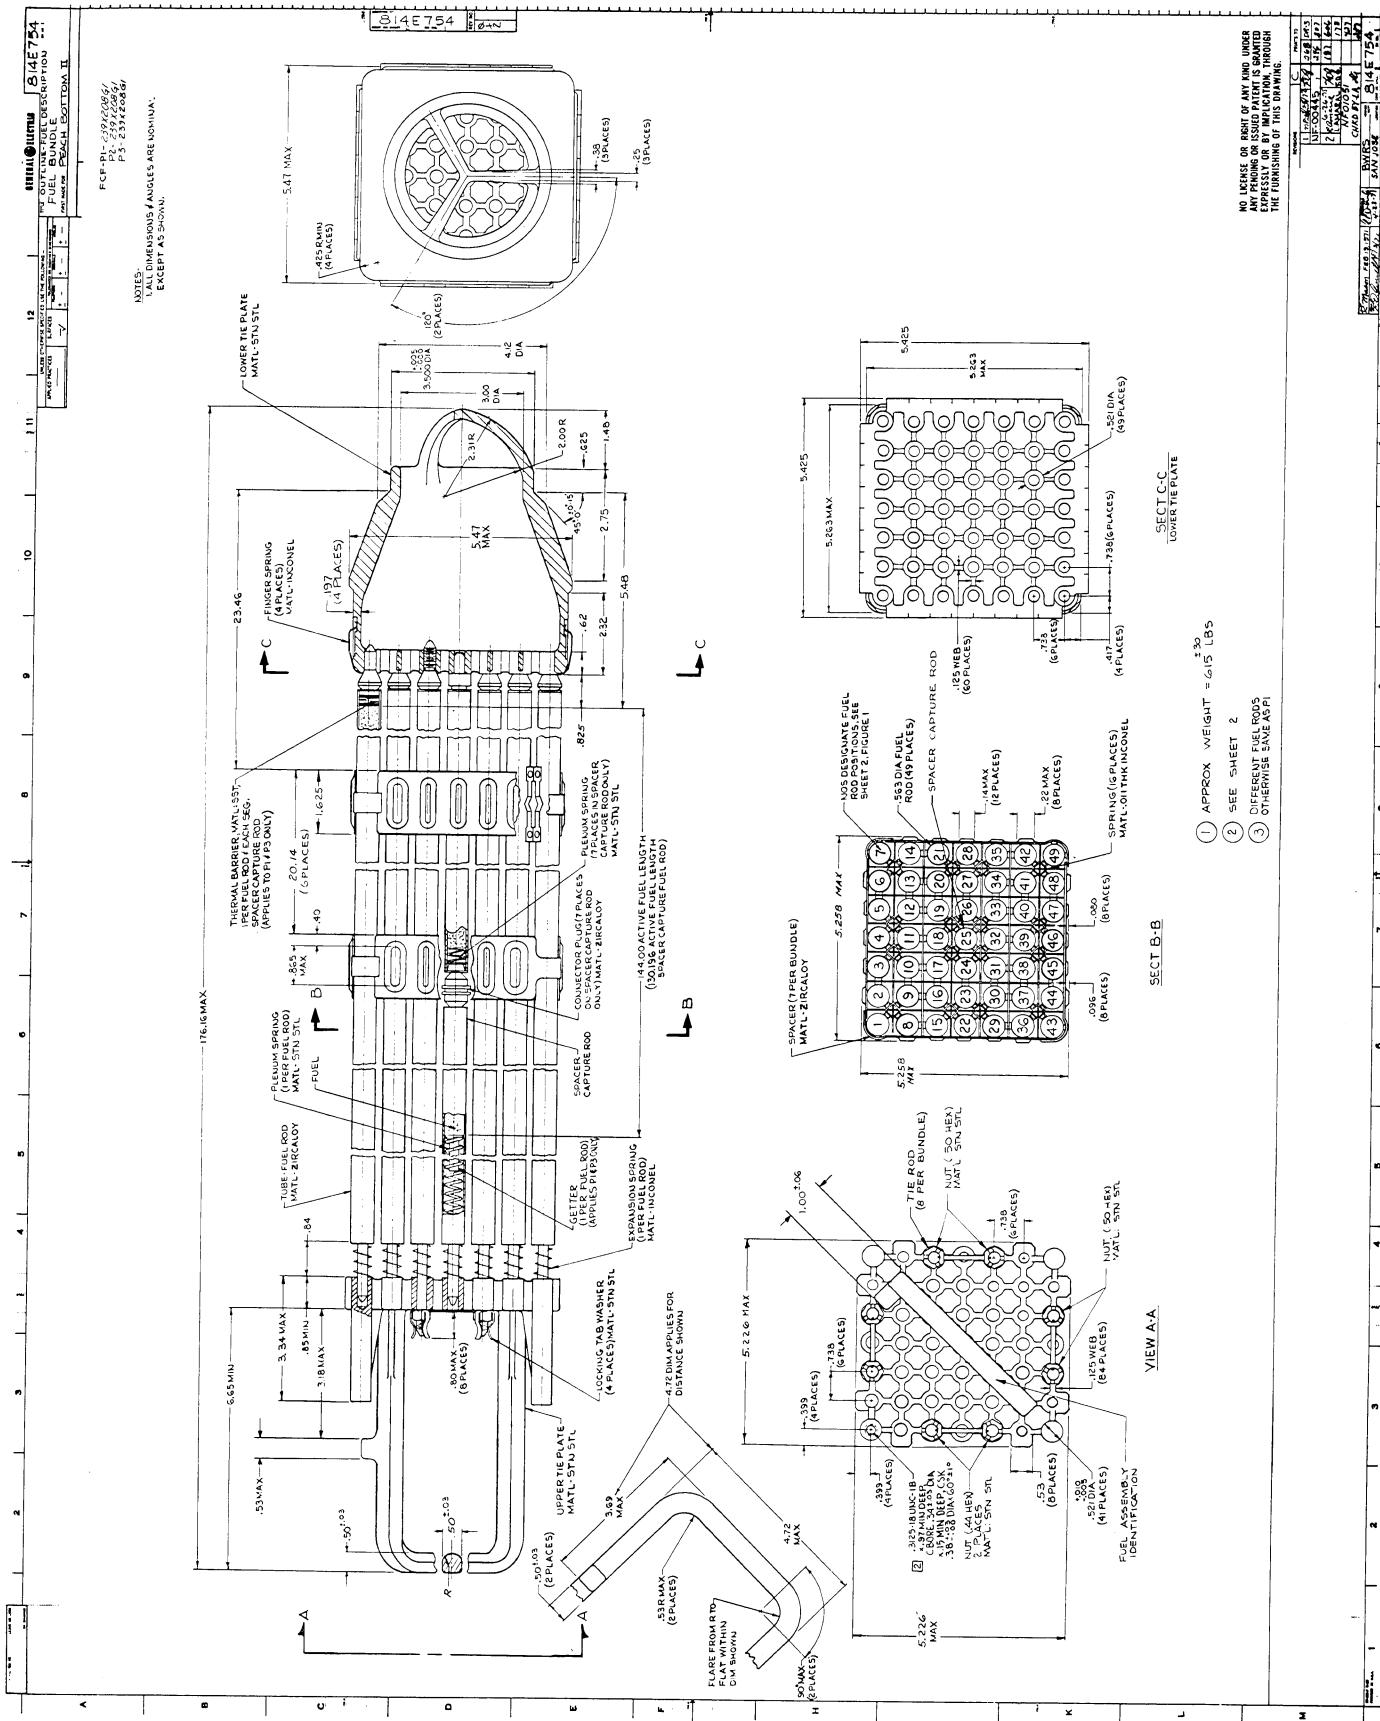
Fuel Assembly Drawing for Initial Core Fuel
